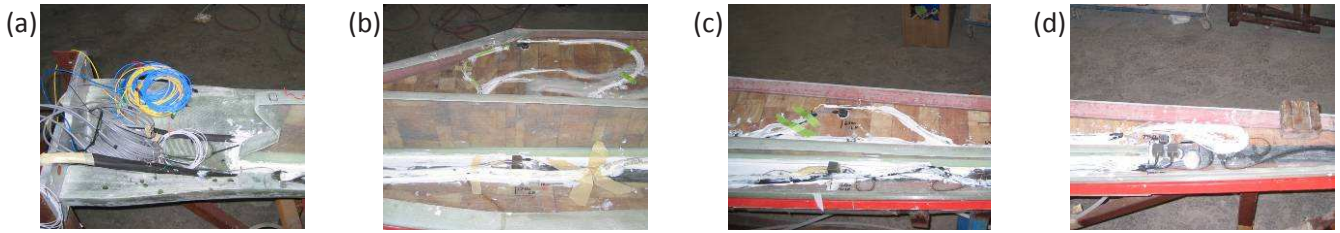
Sensorized rotor blade during fabrication with accelerometer arrays embedded on the high-pressure sides at span-wise distances of: (a) 0 m, (b) 1.74 m, (c) 6.5 m, and (d) 8 m.
